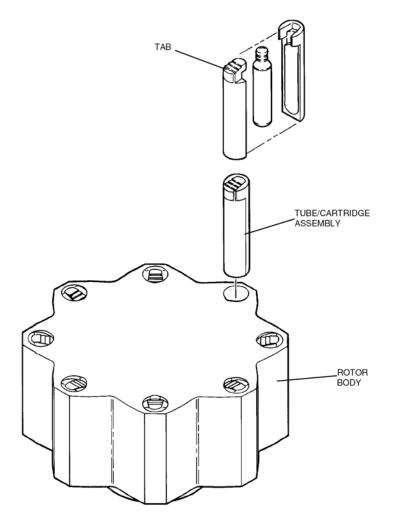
Proper Installation of the Tube/Cartridge Assembly
